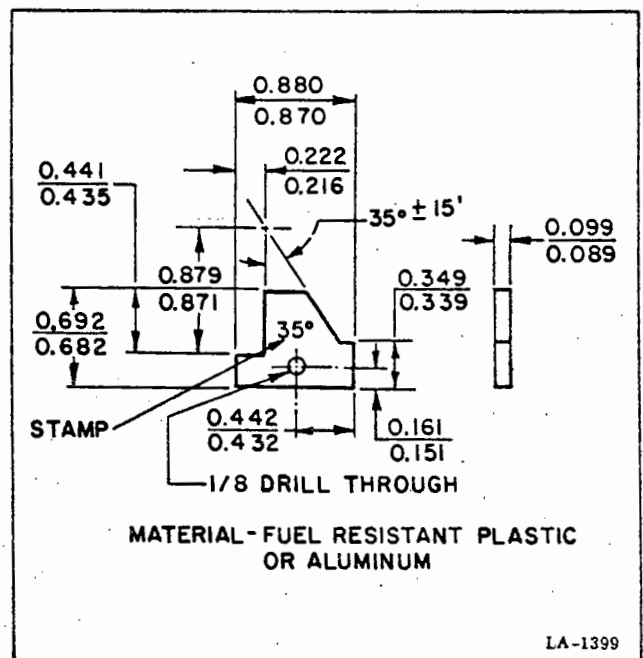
Dimensions for Manufacturing the T25939 Gage
